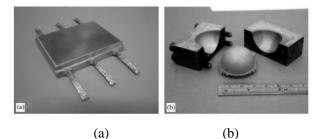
Using cold spray technology to produce pure titanium parts (a) and pure titanium hemisphere parts (b) with the help of a mold [38]
